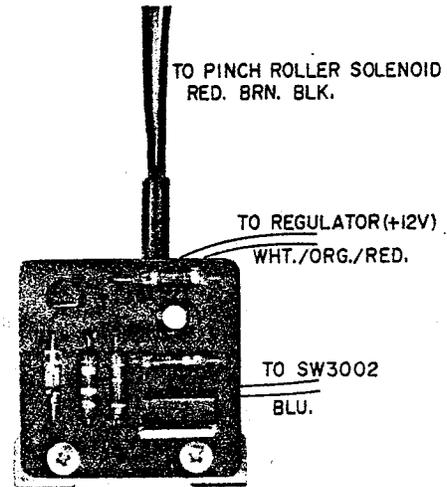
Pinch Roller Solenoid Control P.C. Board (PX-508)
